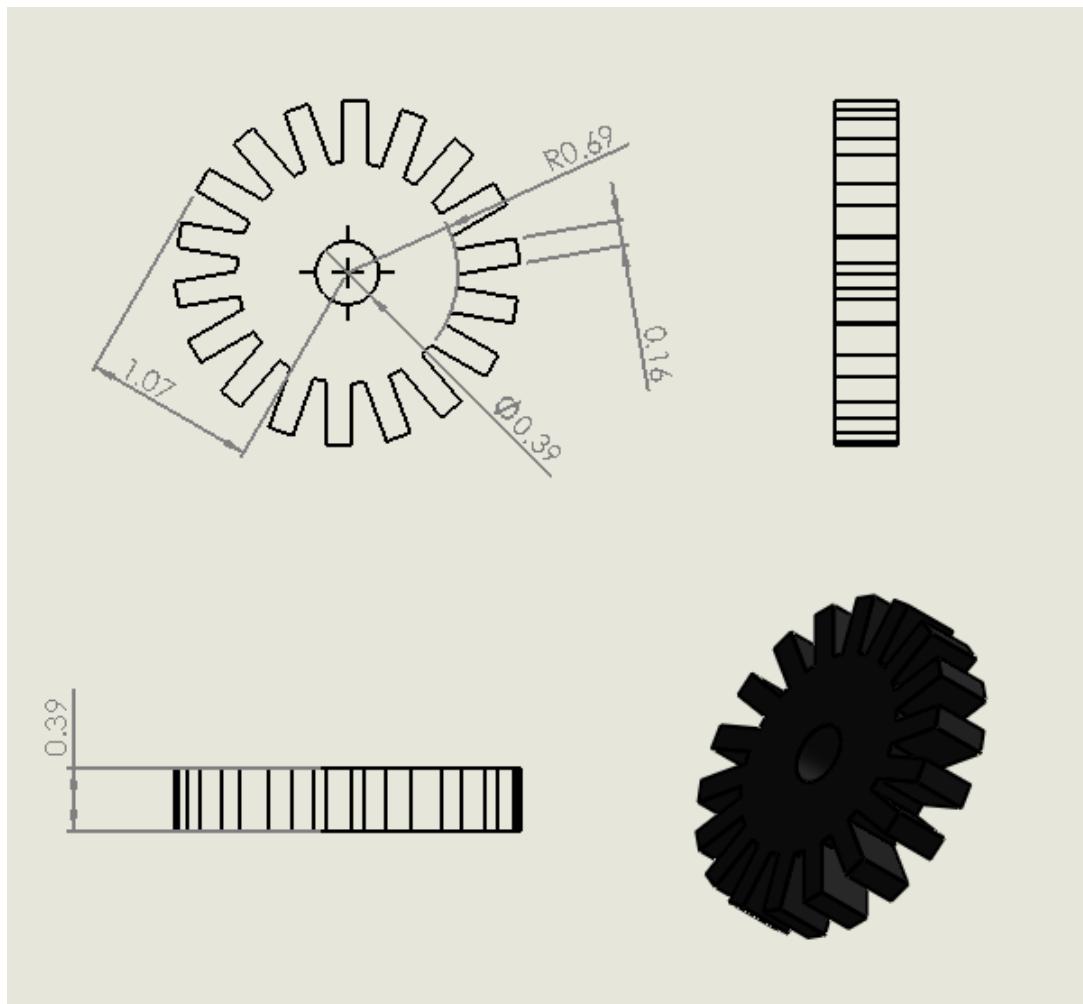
Stirring Gear Made Using SolidWorks 2022
